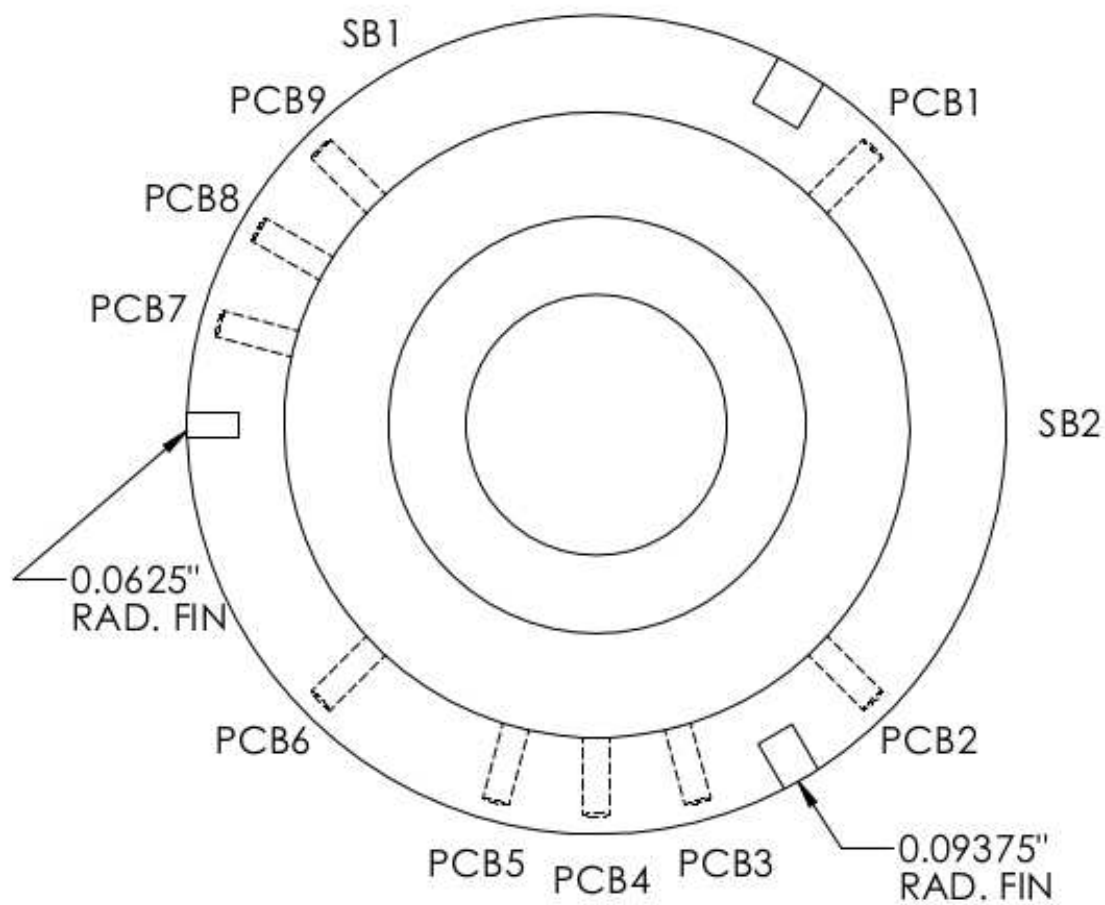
Entry 6 PCB and SB locations. View from back end of cone.
